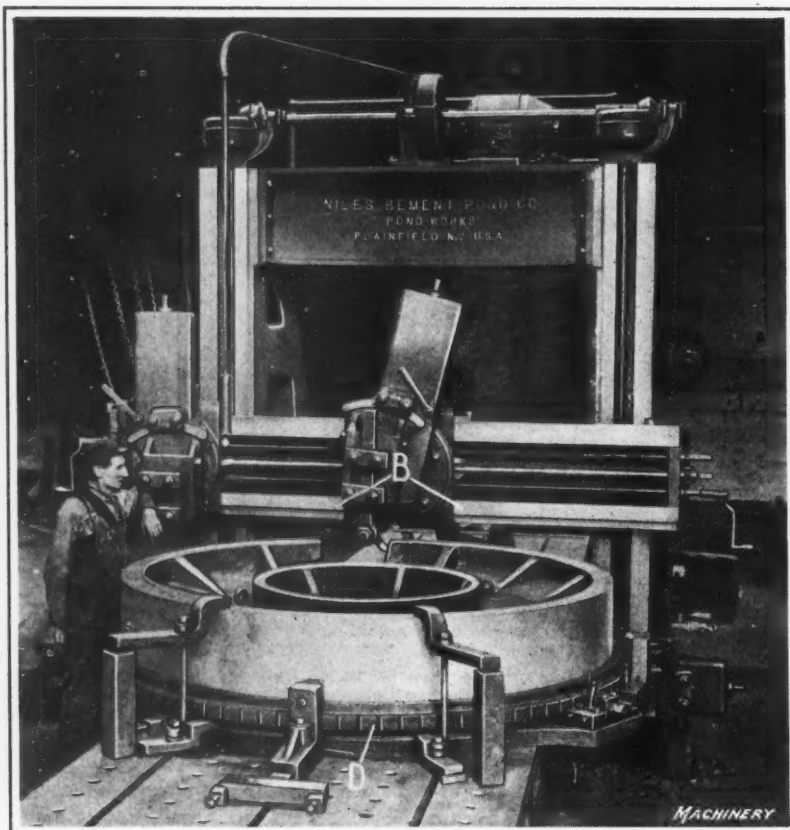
Planer equipped for machining the Seat for the Removable Segment of a Car-wheel Driving Gear
